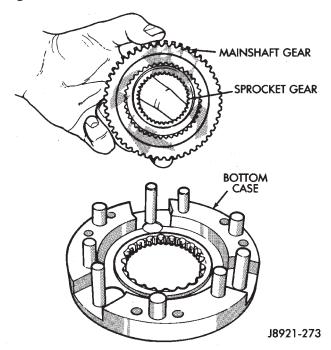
Mainshaft And Sprocket Gear Removal ASSEMBLE
